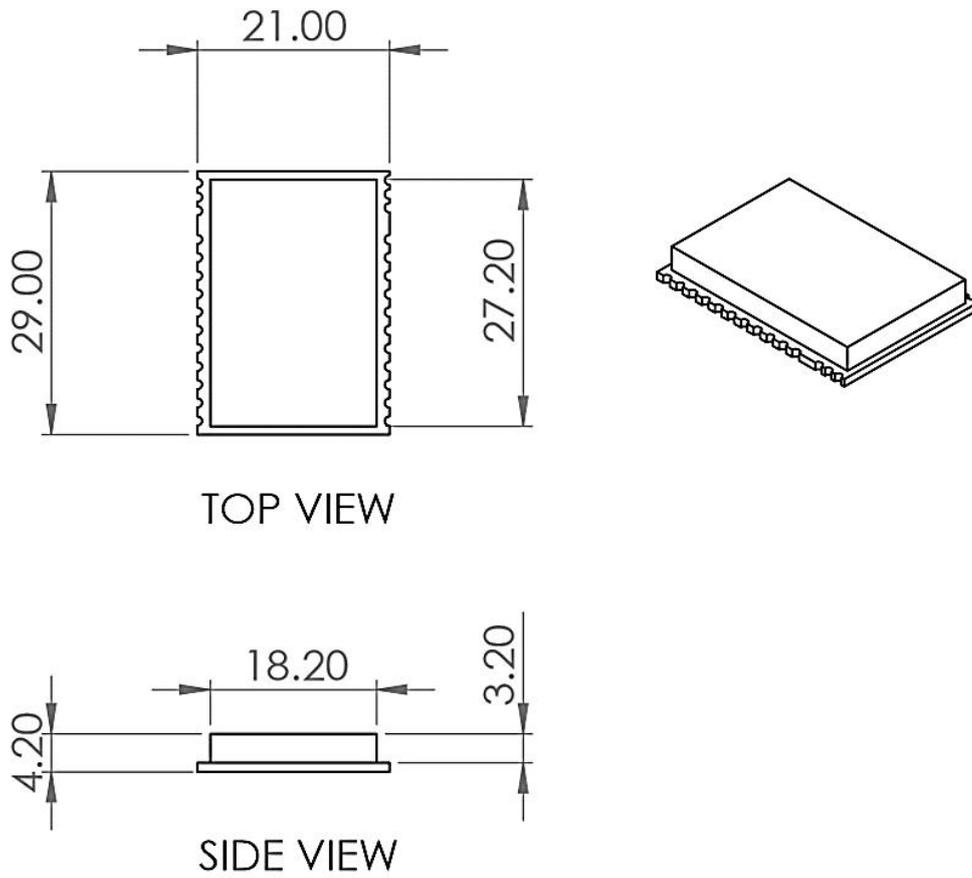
Dimensional drawing of RFD900ux-SMT/RFD868ux-SMT modem
